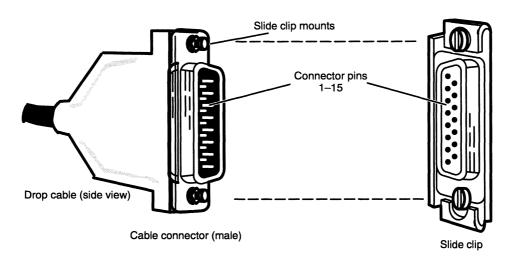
Aligning Slide Clip Mounts with a LAN Connector
